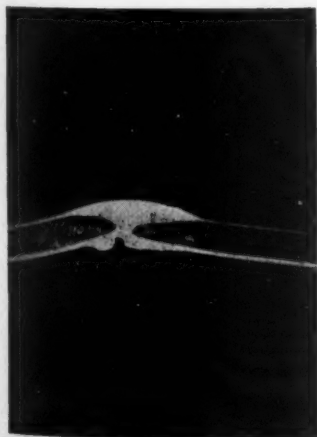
(left).—Section of chromium-diffused mild-steel tube, showing how the core, exposed by shearing, is protected by the austenitic weld metal.
